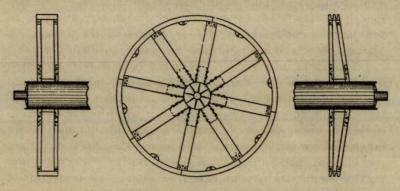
Detailed drawing of steel bull wheels; consisting of a full side view of the grooved wheel in the centre; on the right, an edge view of the brake wheel, and on the left, an edge view of the tug rope wheel.
